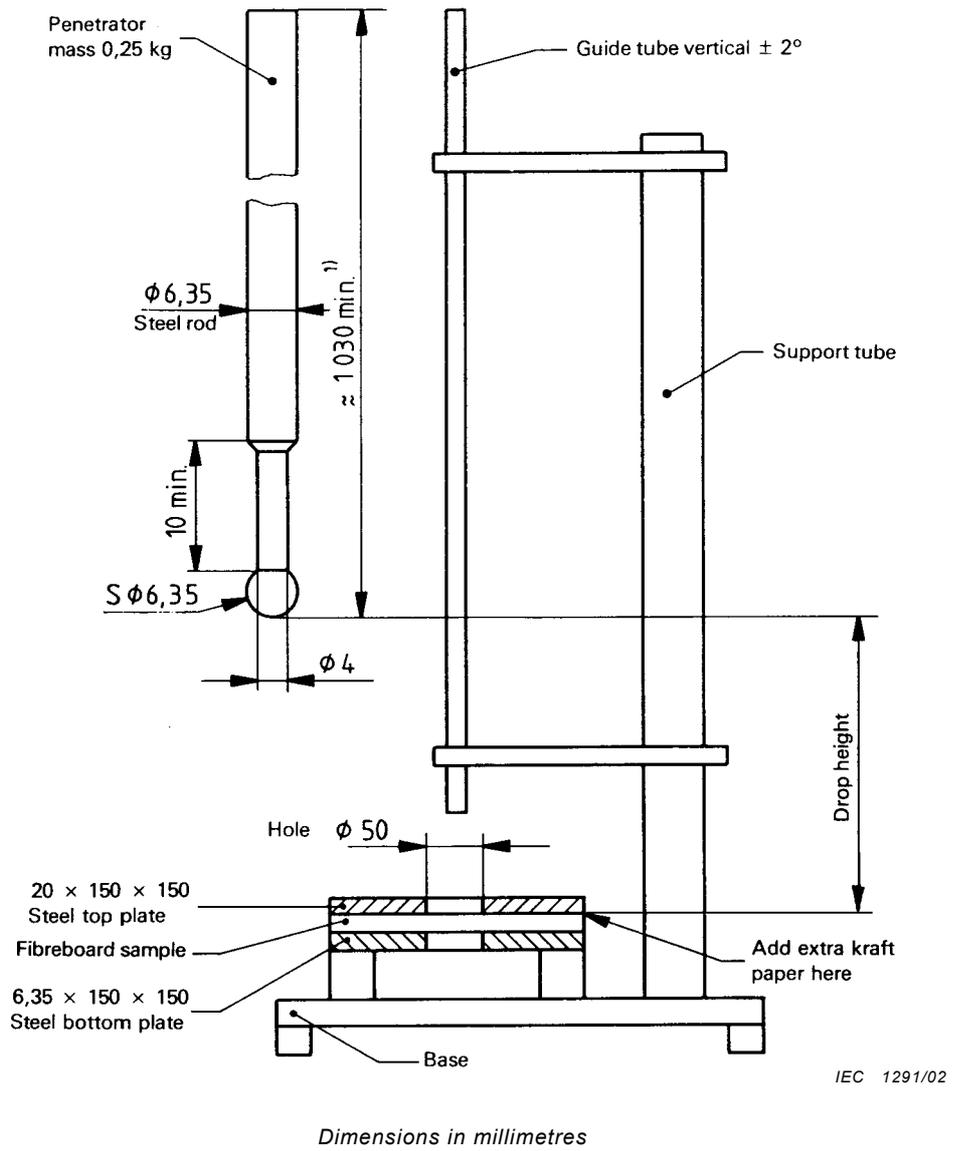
Test fixture for corrugated fibreboard penetration test
